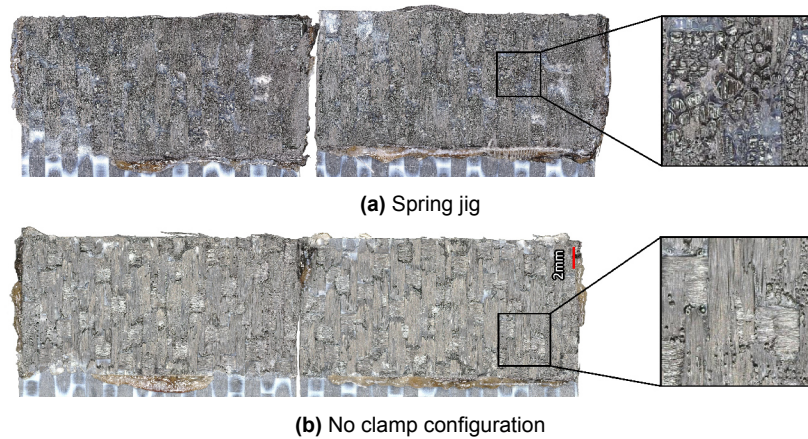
Fracture surface of specimens welded with different clamping configurations; Vibration amplitude (peak-to-peak): 80 μm , welding pressure: 1.6 MPa (500 N), consolidation time: 600 ms, consolidation pressure: 1.6 MPa, weld control - displacement to 0.07 mm
